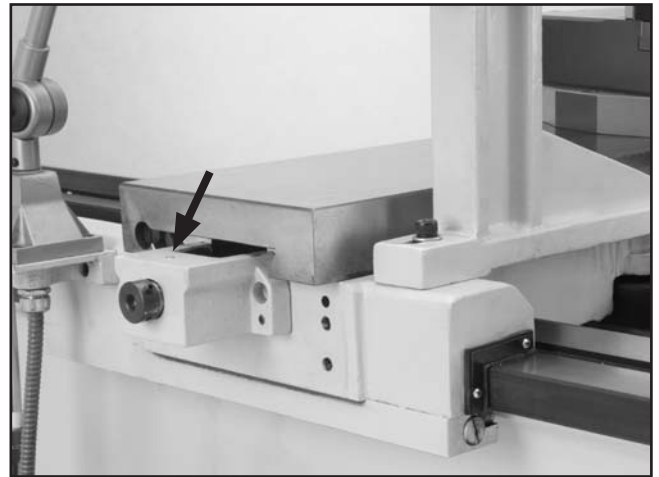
Cross slide leadscrew end bearing ball oiler location: 1 ball oiler on the cross slide lead screw end cap.
